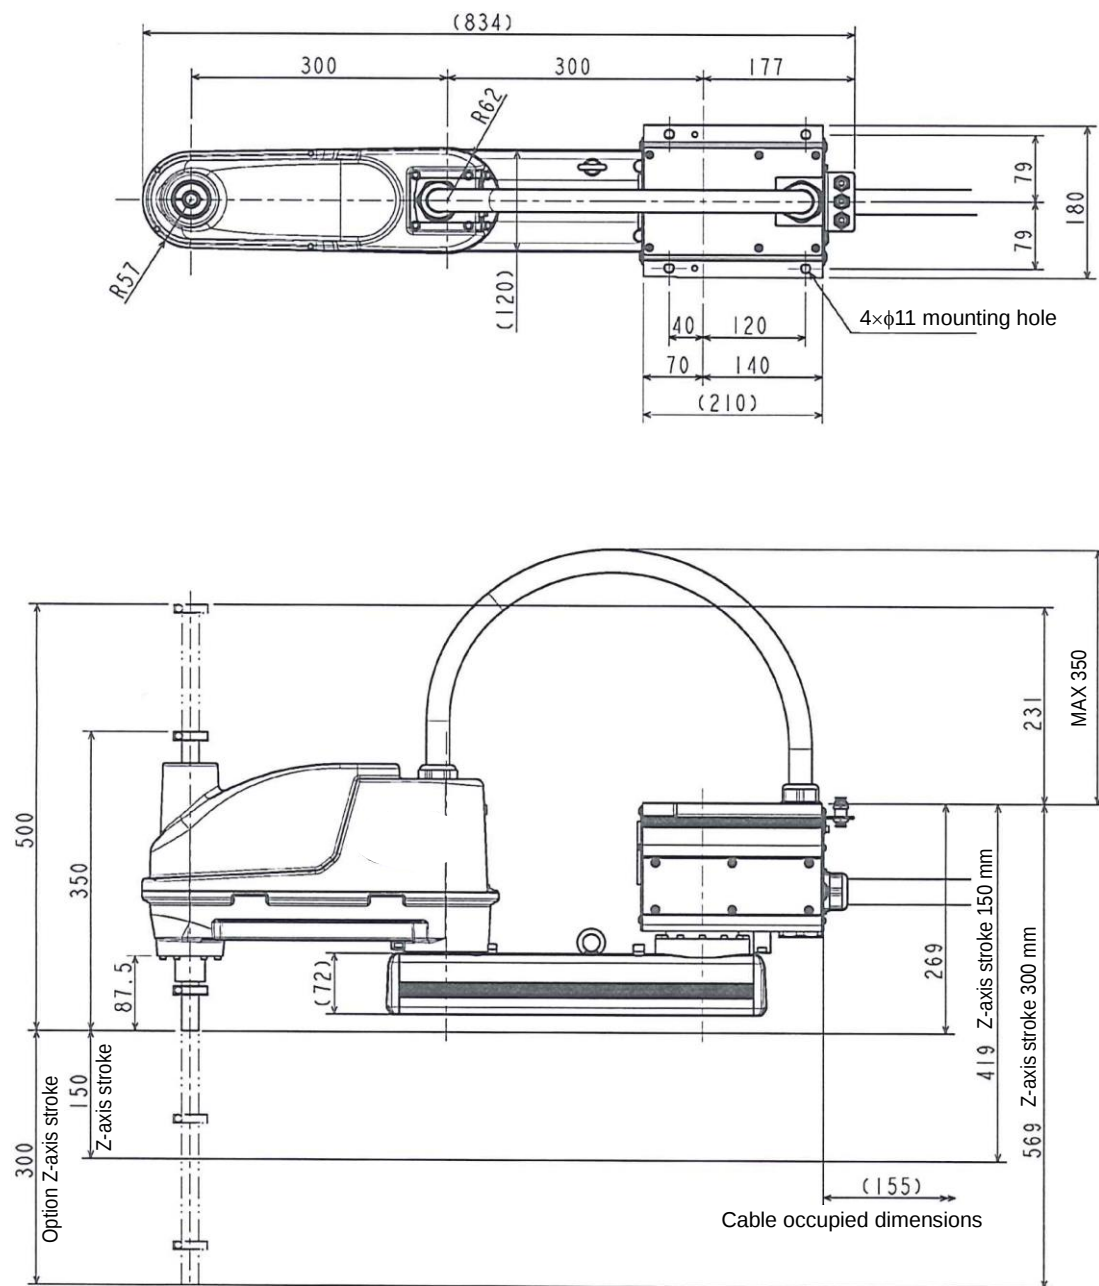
Outer dimensions of the robot (KHL-500-T)
